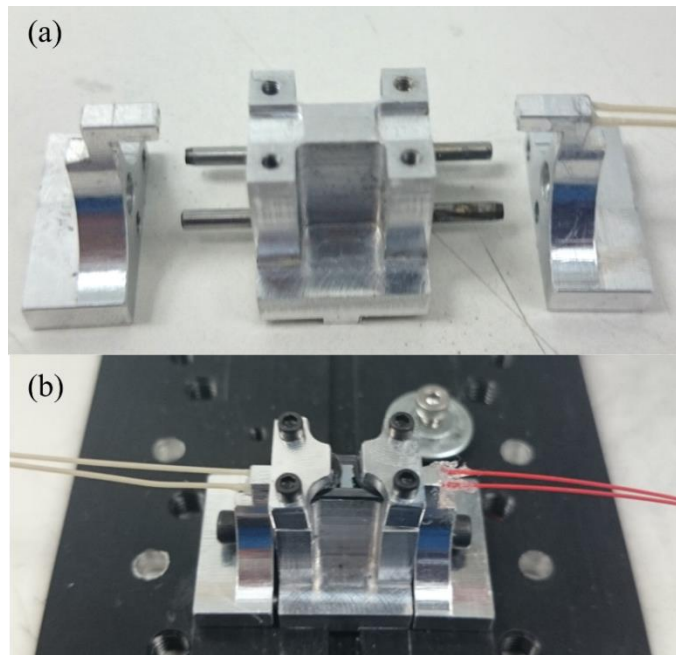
The fluidic jig for LRSPB biosensor with side-access fluidic channels (a) before and (b) after assembly.
